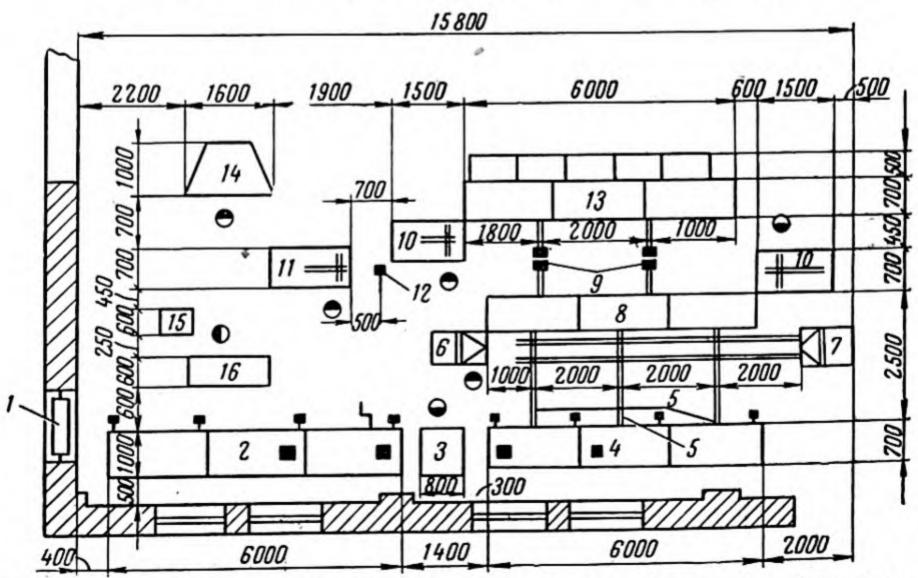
Layout of production line equipment for processing steel conduit pipes.
